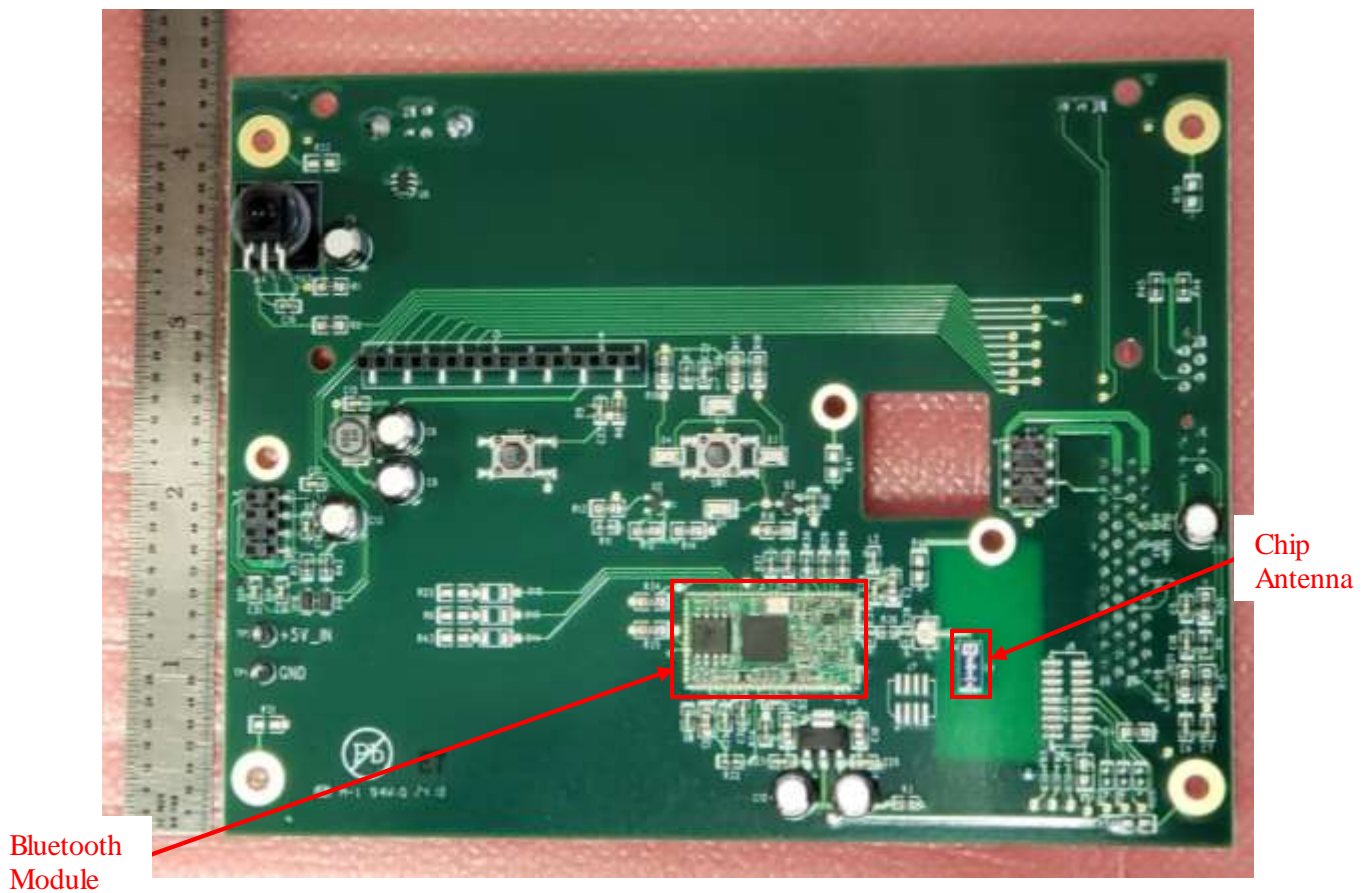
Photo of No5805 and No5802 Front Panel PCB (Front View)
